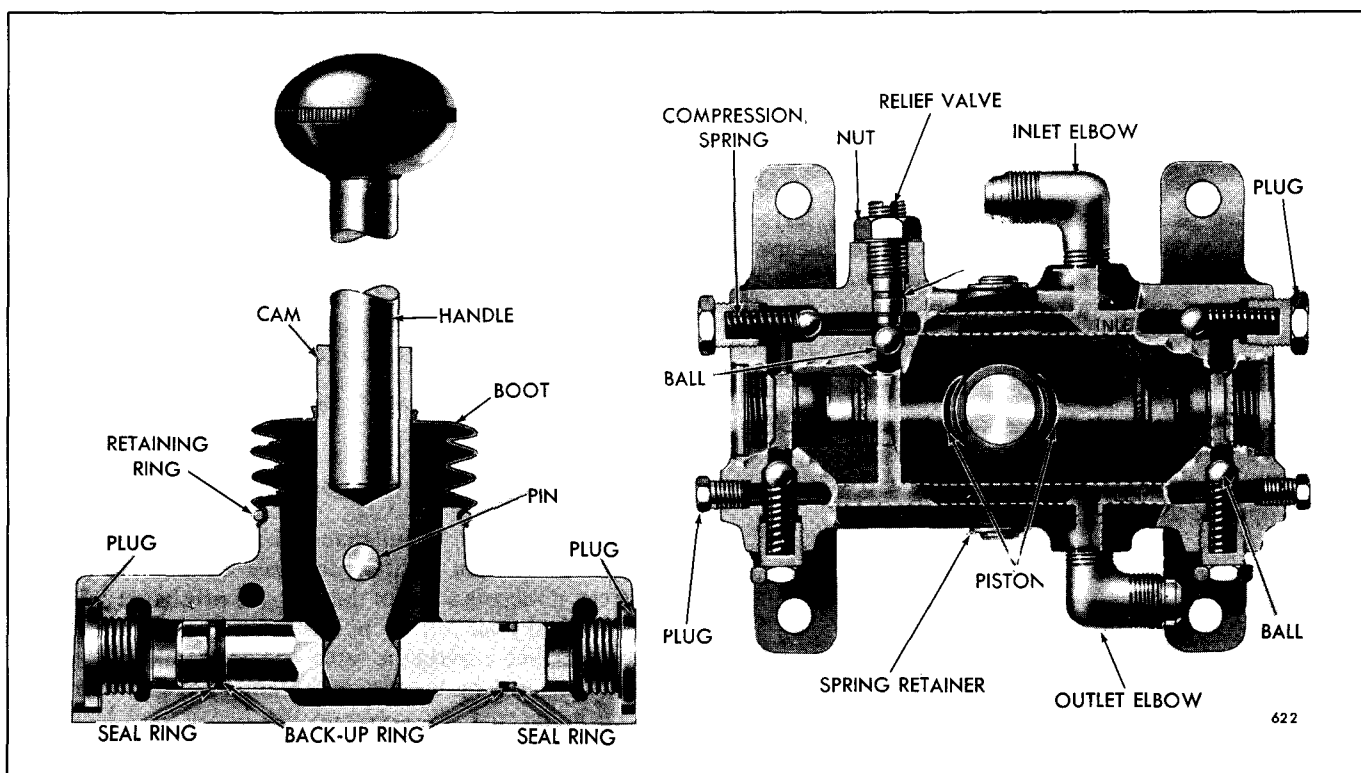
Cross Sections of Hydrostarter Hand Pump
